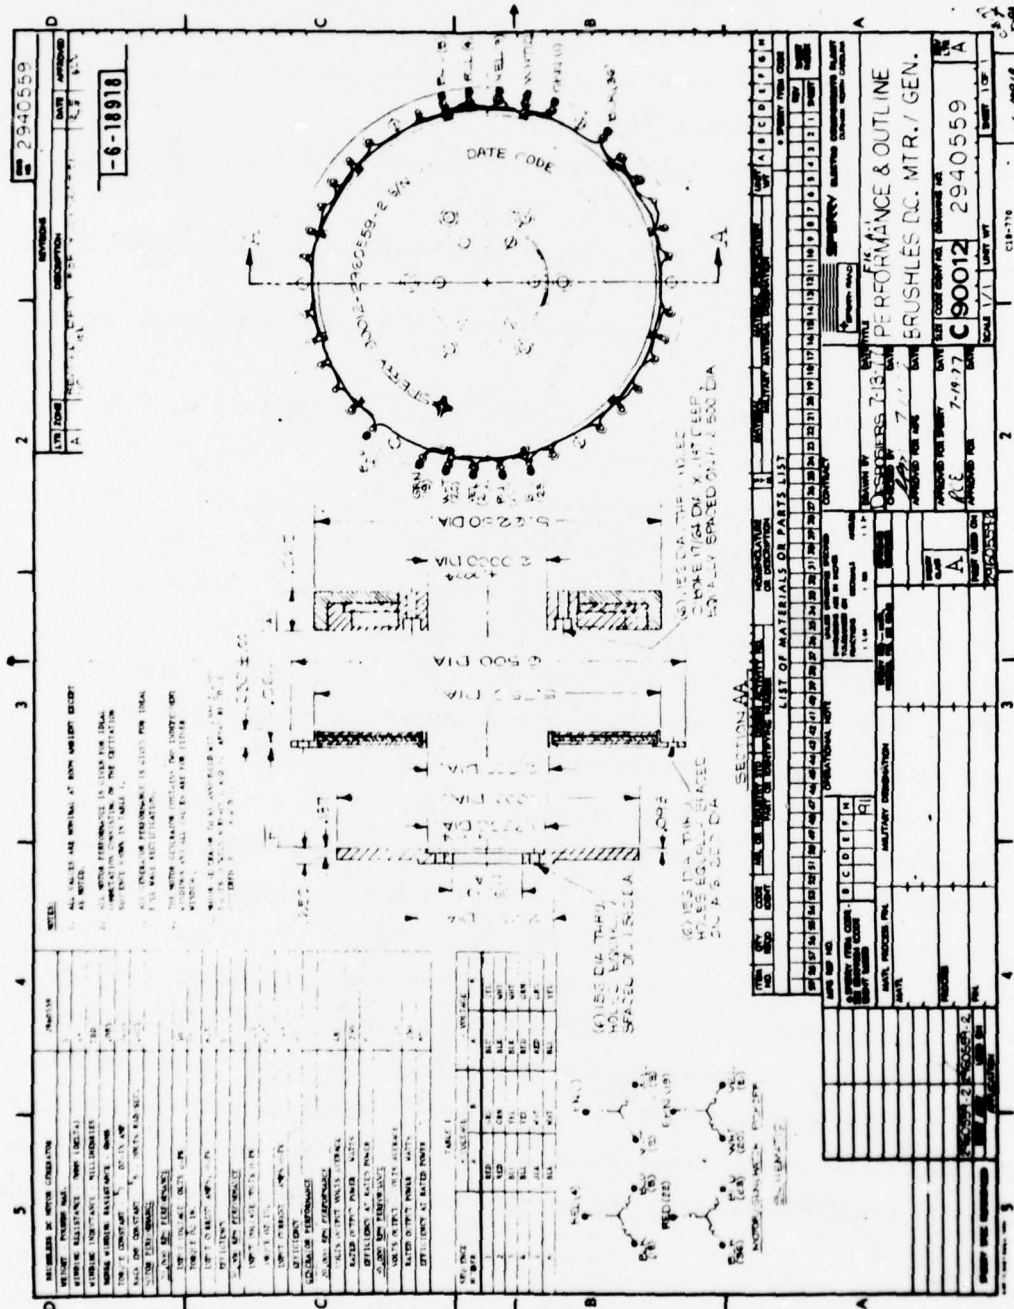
Performance and outline drawing of brushless dc motor generator.
